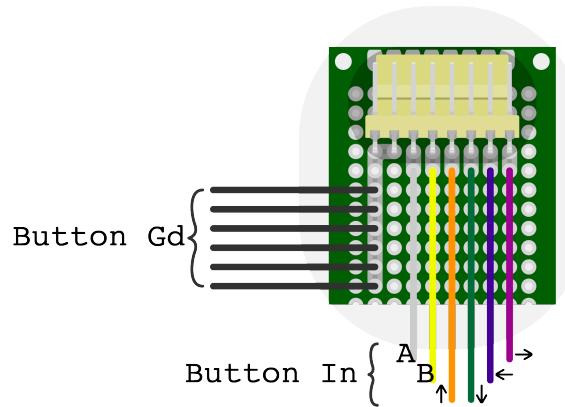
Soldering the buttons and connector to the perfboard, see Figure 3.7.
